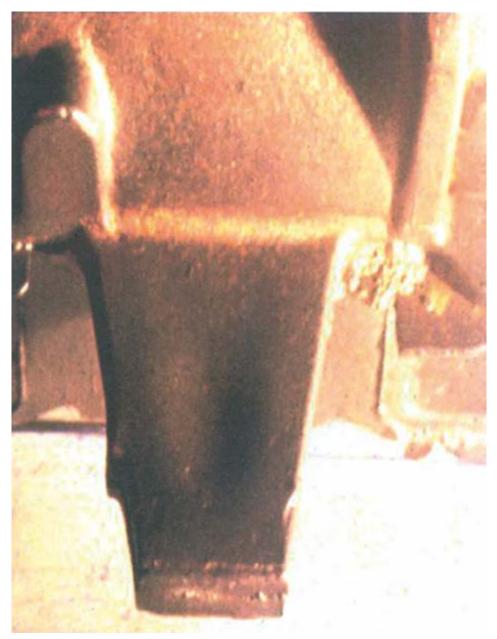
Surface sink is due to lack of feeding; uniform shrinkage occurs without rupturing the surface.
